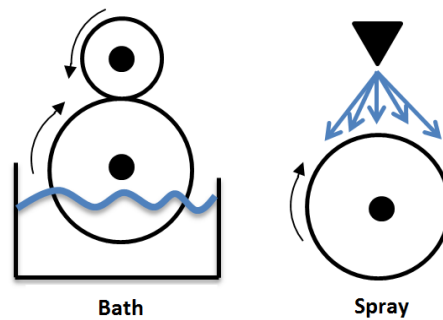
Lubrication methods; the black center represents a drive shaft.
